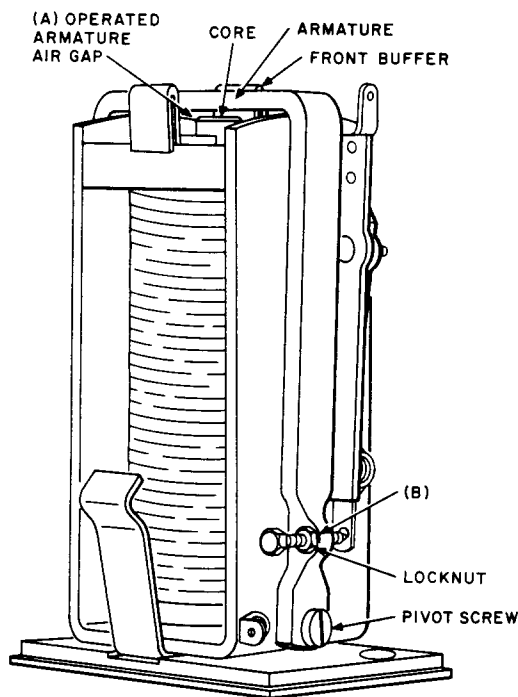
85F-Type Relay — Showing Operated Air Gap and Locknut on Contact Screw
